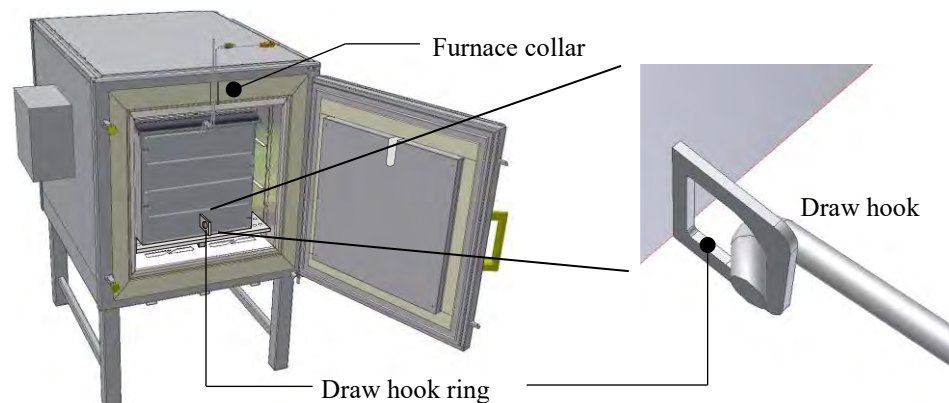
Example: Charging the annealing box into the furnace (Models to N(A) 120../)
